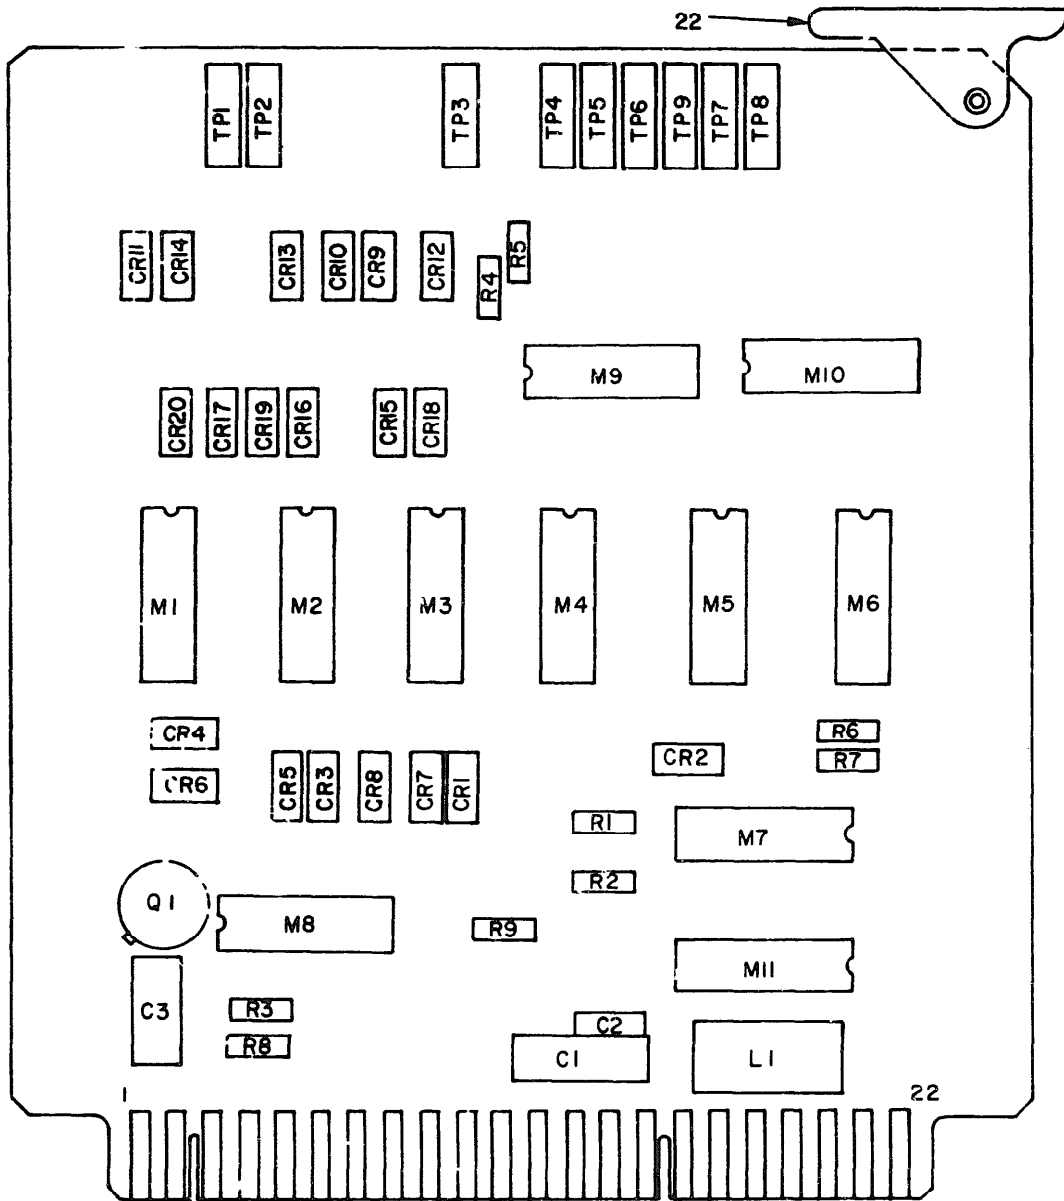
Printed Wiring Assembly (A7) (Sheet 1 of 2).
